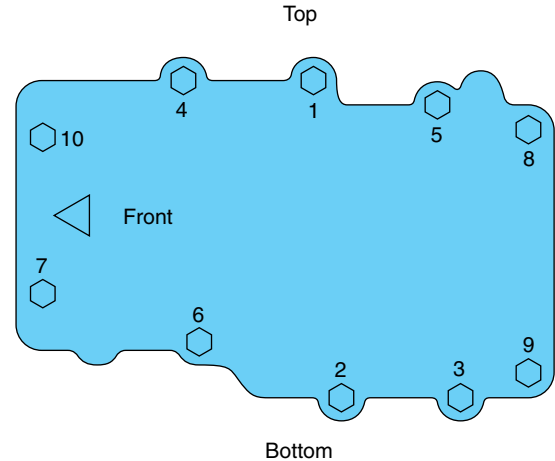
The case-to-cover bolts of this TR-3550 transmission should be tightened to 18–22 lb-ft (24.4–29.8 N-m) using this sequence. Note that it starts with the center bolts and works to the ends. (Courtesy of Transmission Technologies Corporation, TTC)
